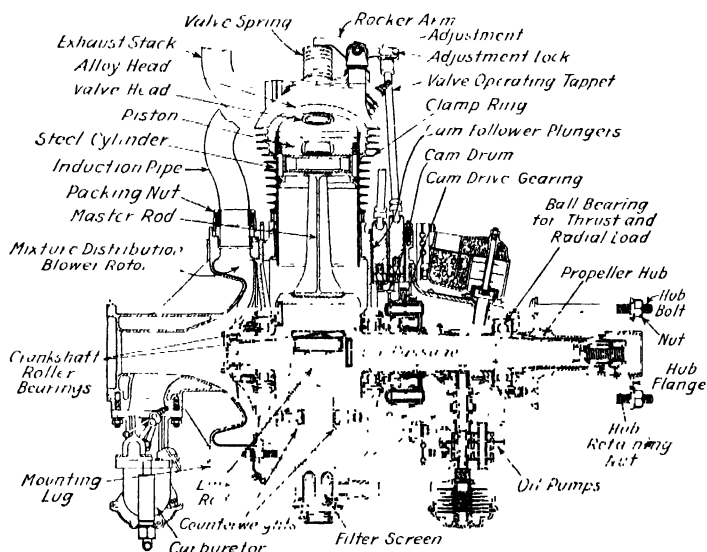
B.—Sectional View of Armstrong-Siddley Genet Engine Showing Roller Bearing Crankshaft.
